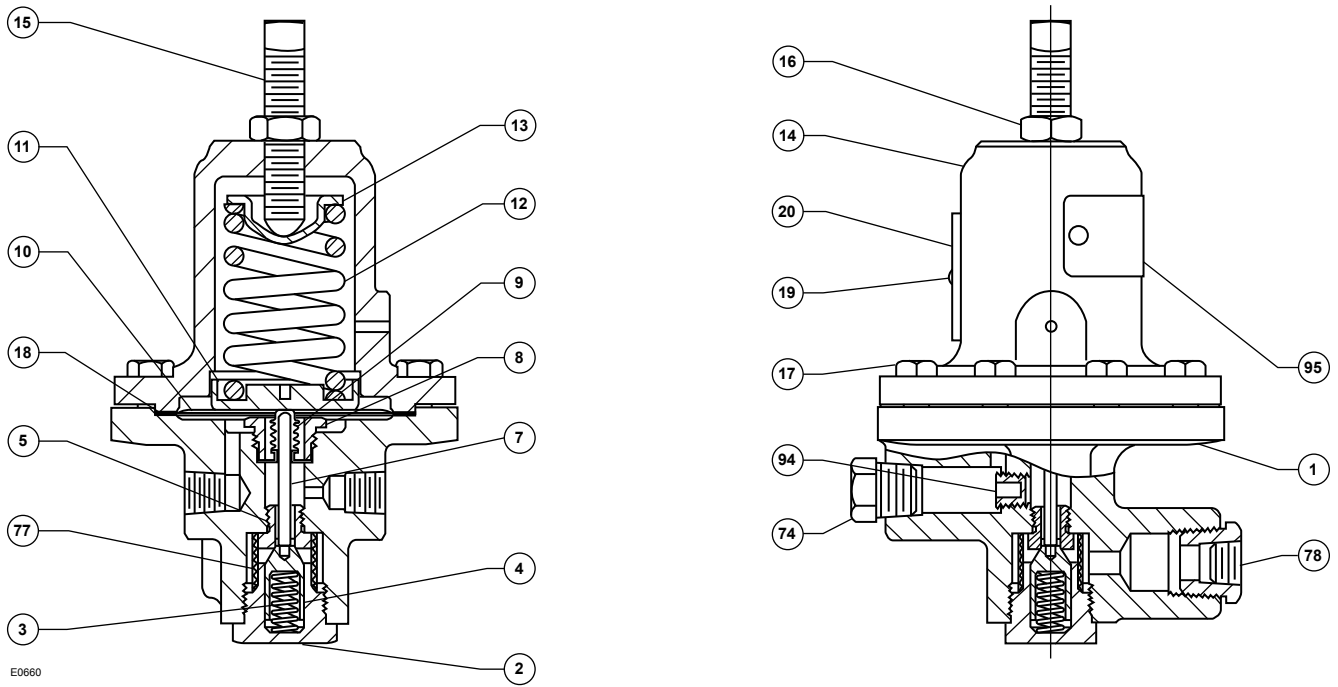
Type 6492HM or 6492HTM Safety Override Pilot Assembly
